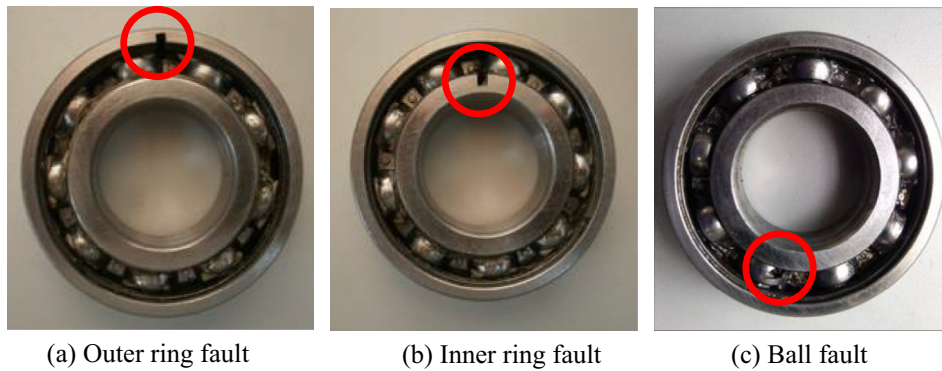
Faults in 6206 ball bearing of aero-engine rotor experimental rig.
